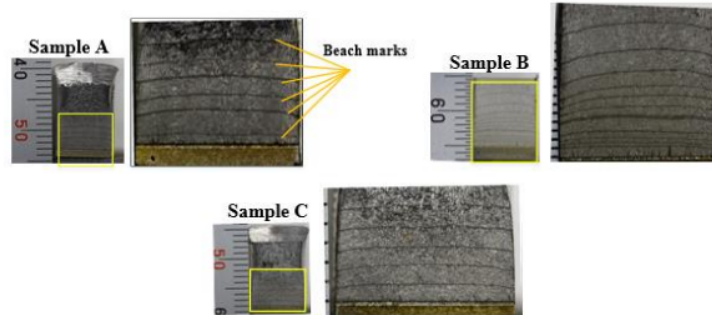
Fracture surface with beach marks obtained by experimental testing
